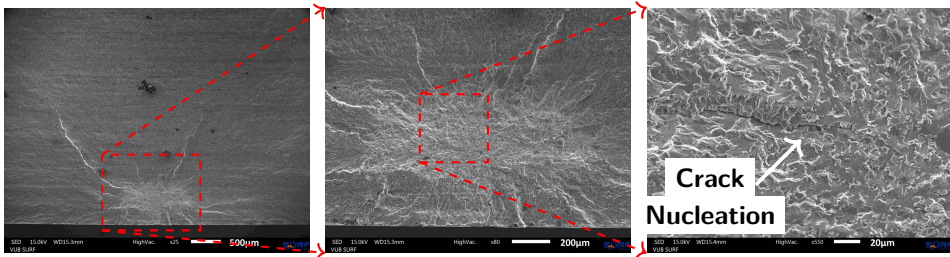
SEM images of the fracture surface of Specimen 6 (wrought material without capillaries). The fatigue crack initiated from an internal defect near the bottom of the specimen.
